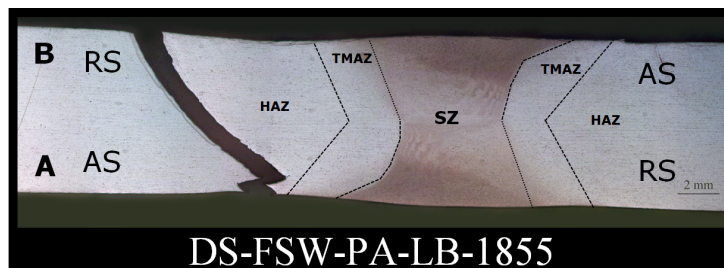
Macro-morphology of DS-FSW-PA-LB-1855 weld fracture.
